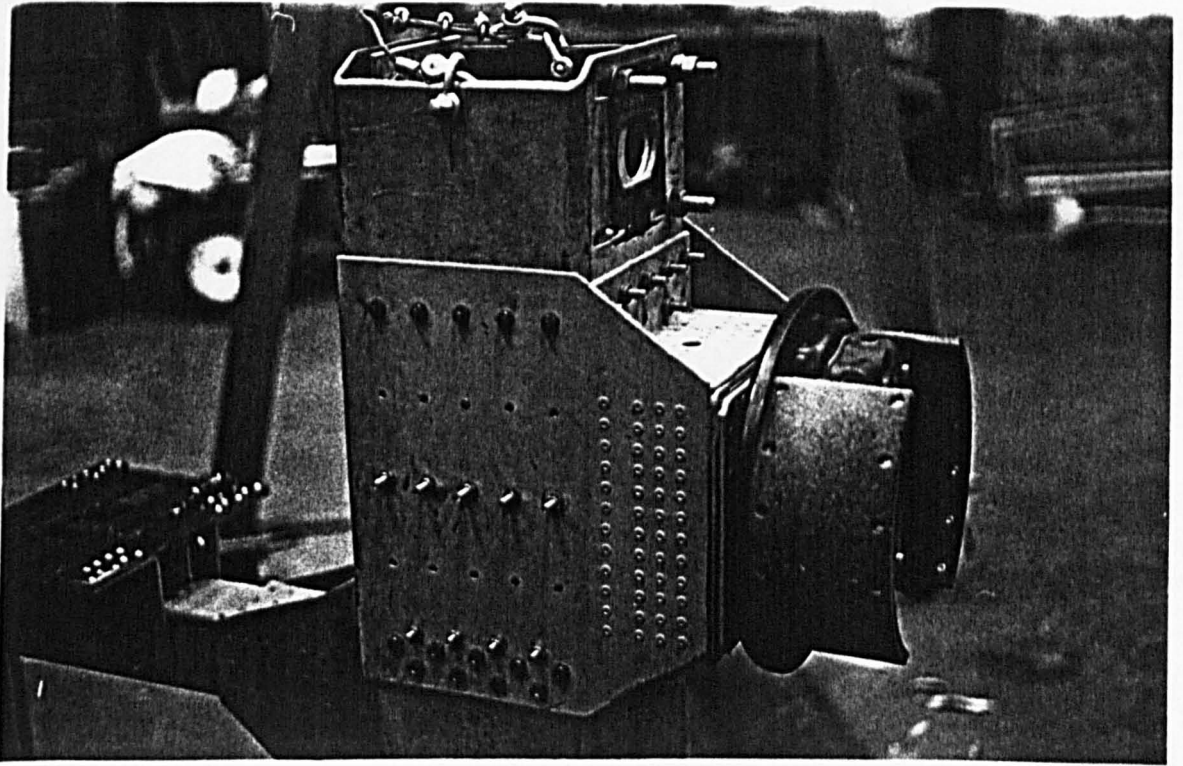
Views of chassis showing bolted and riveted construction and brake
